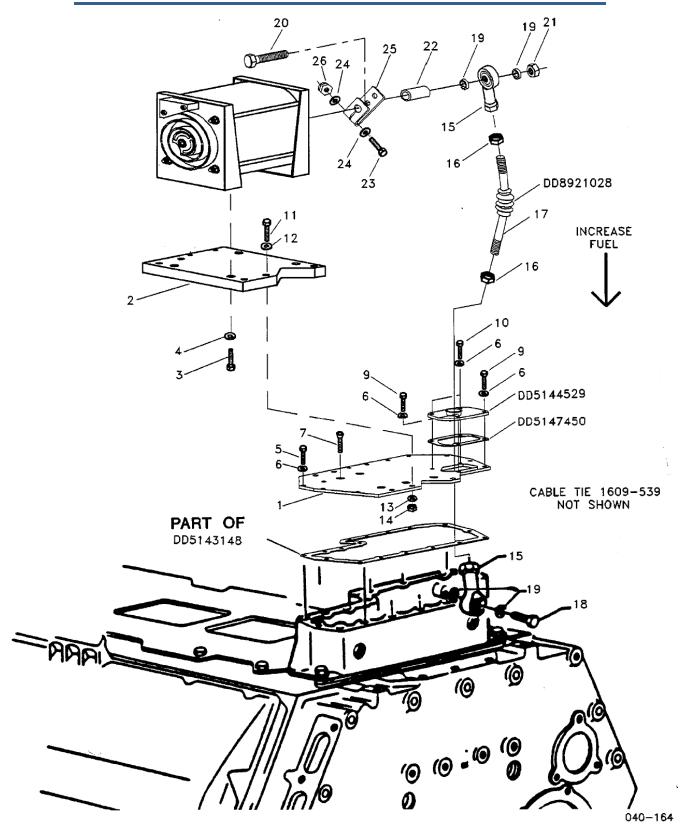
Woodward EPG Assembly on DD V-149 Engine
